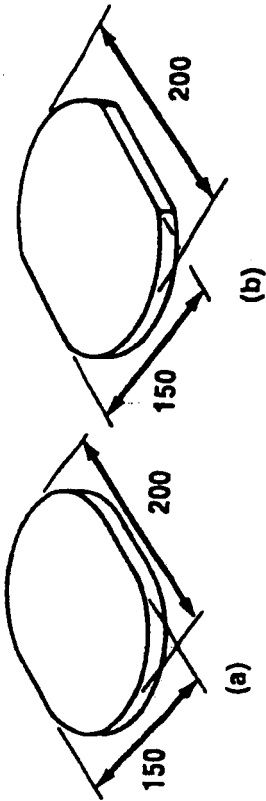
Sheet metal part, dimensions in mm. (a) Blanking design. (b) Part-off design.
